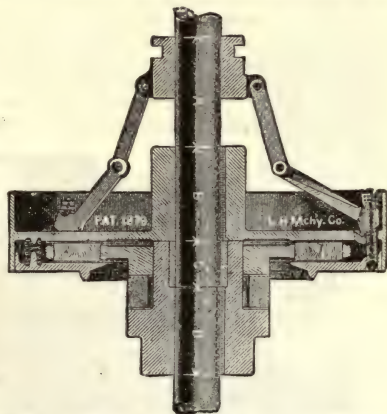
Link Belt Eng. Co.'s disk friction-clutch.
